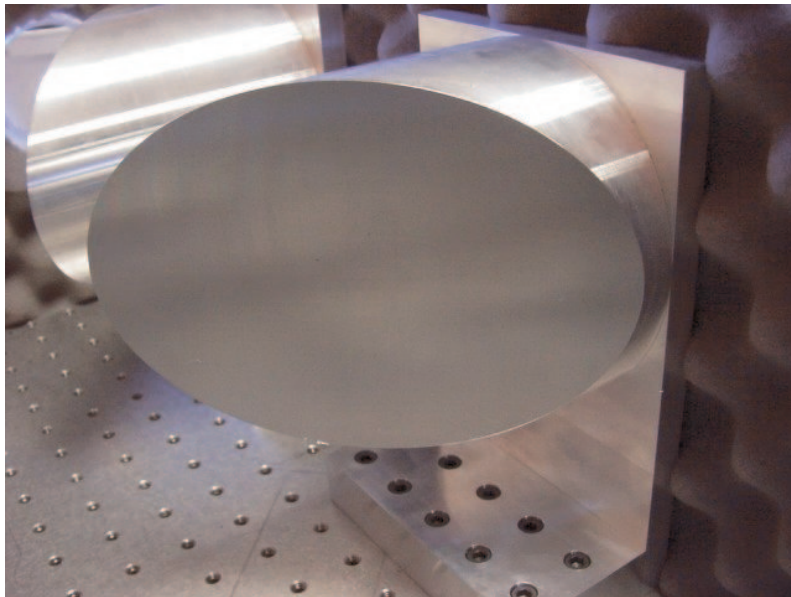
A 127 mm diameter,  $f/4.7$  off-axis parabolic mirror showing the final surface quality.
